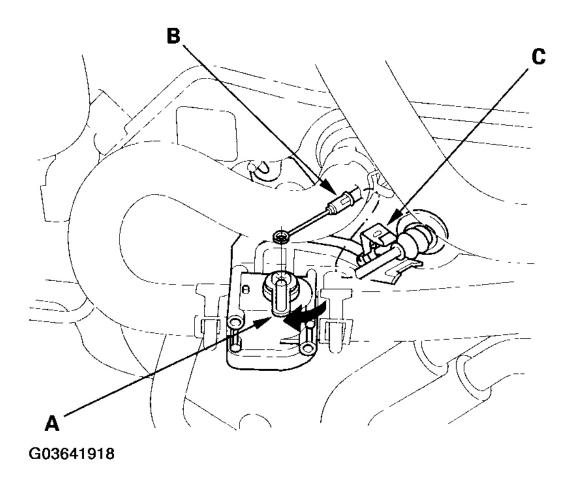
Installing Heater Valve Cable Housing Into Cable Clamp Courtesy of AMERICAN HONDA MOTOR CO., INC.
